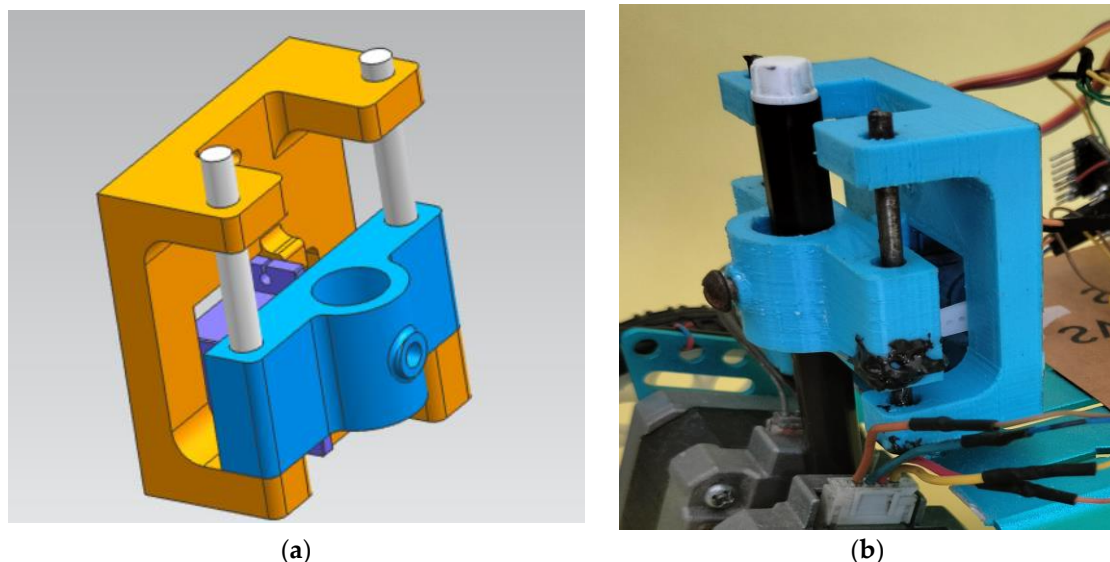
Marking tool (a). 3D CAD Model (b). Actual 3D-printed model with servo motor and pen mounted.
